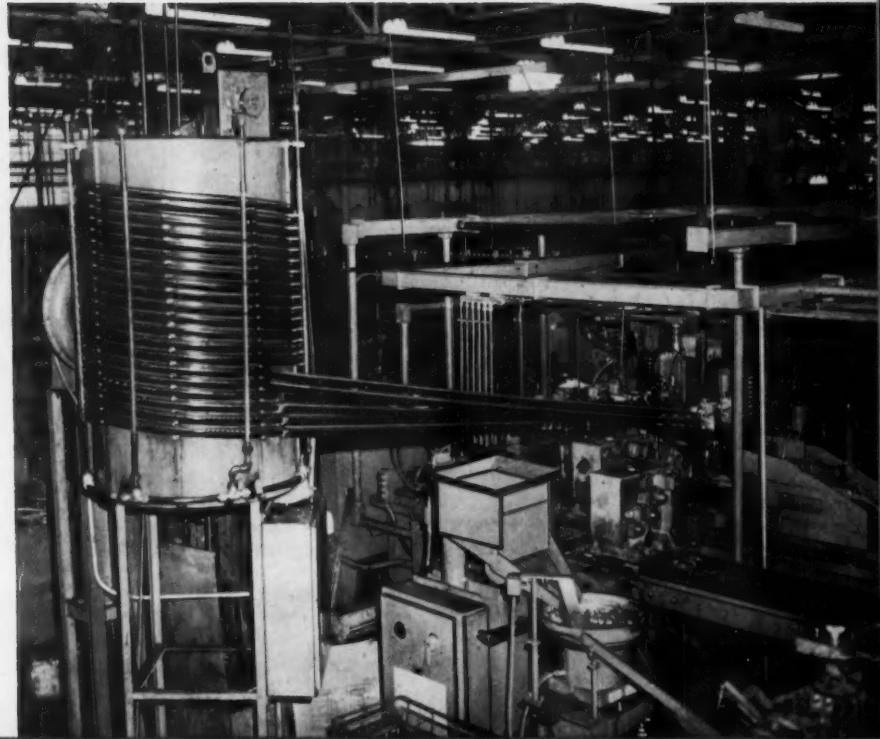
(Below) Close-up view of stations where bearings are pressed into the starter housings and then burnished to required size.
